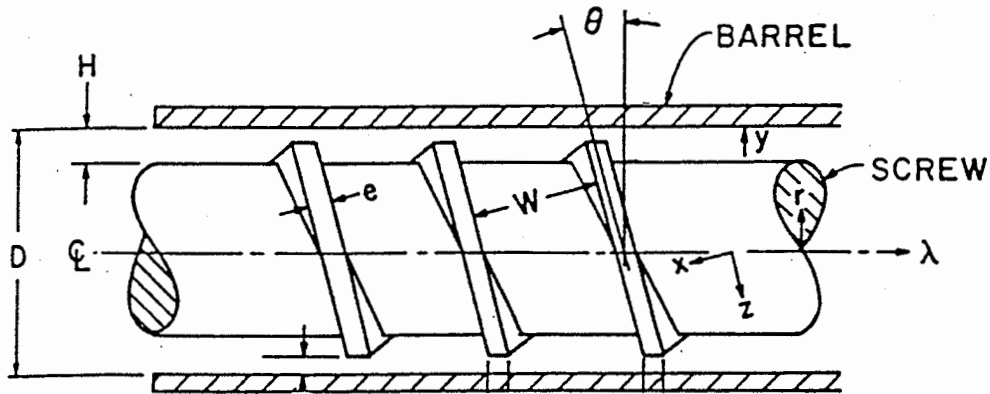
Geometry of an extrusion screw metering section (Harper, 1979)
